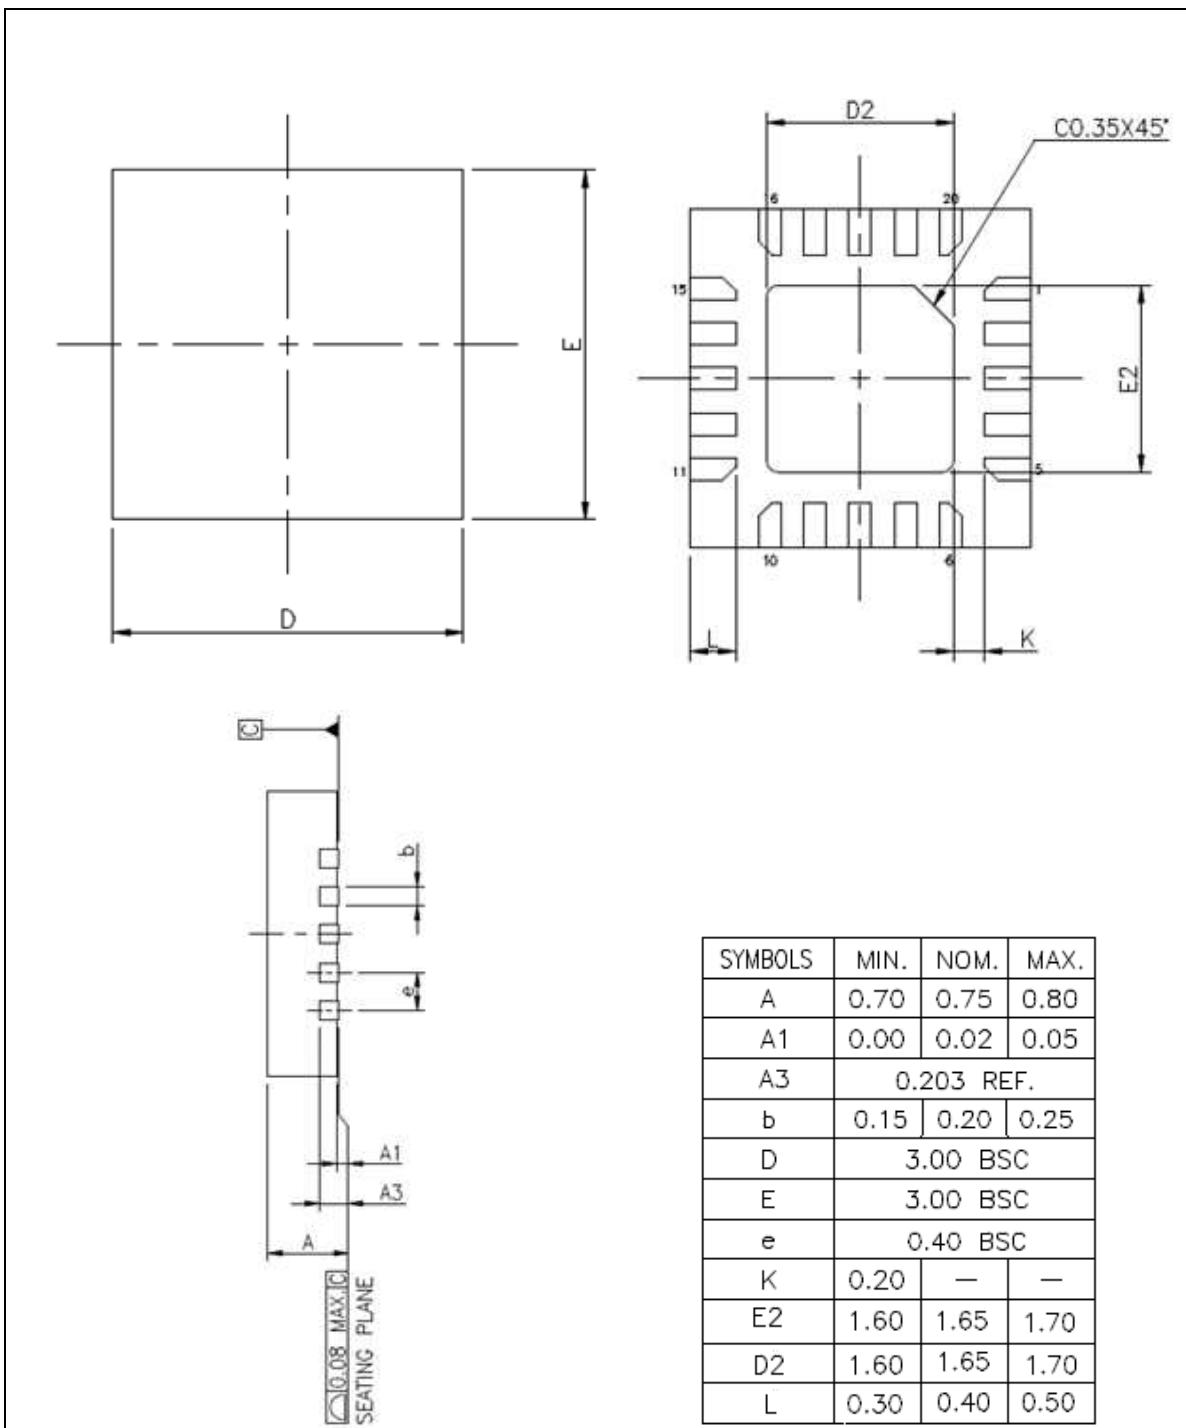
QFN-20 Package Dimension for MS51XB9AE
